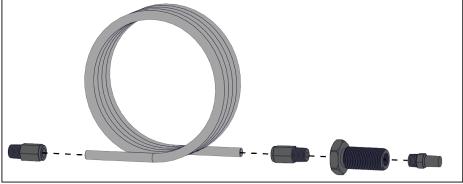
Tubing Installation Remote Blowdown Muffler assembly
